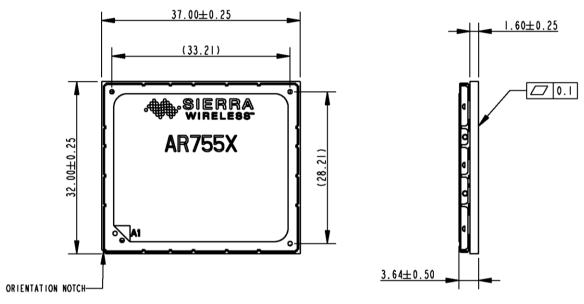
AirPrime AR7558 Mechanical Dimensions Drawing
